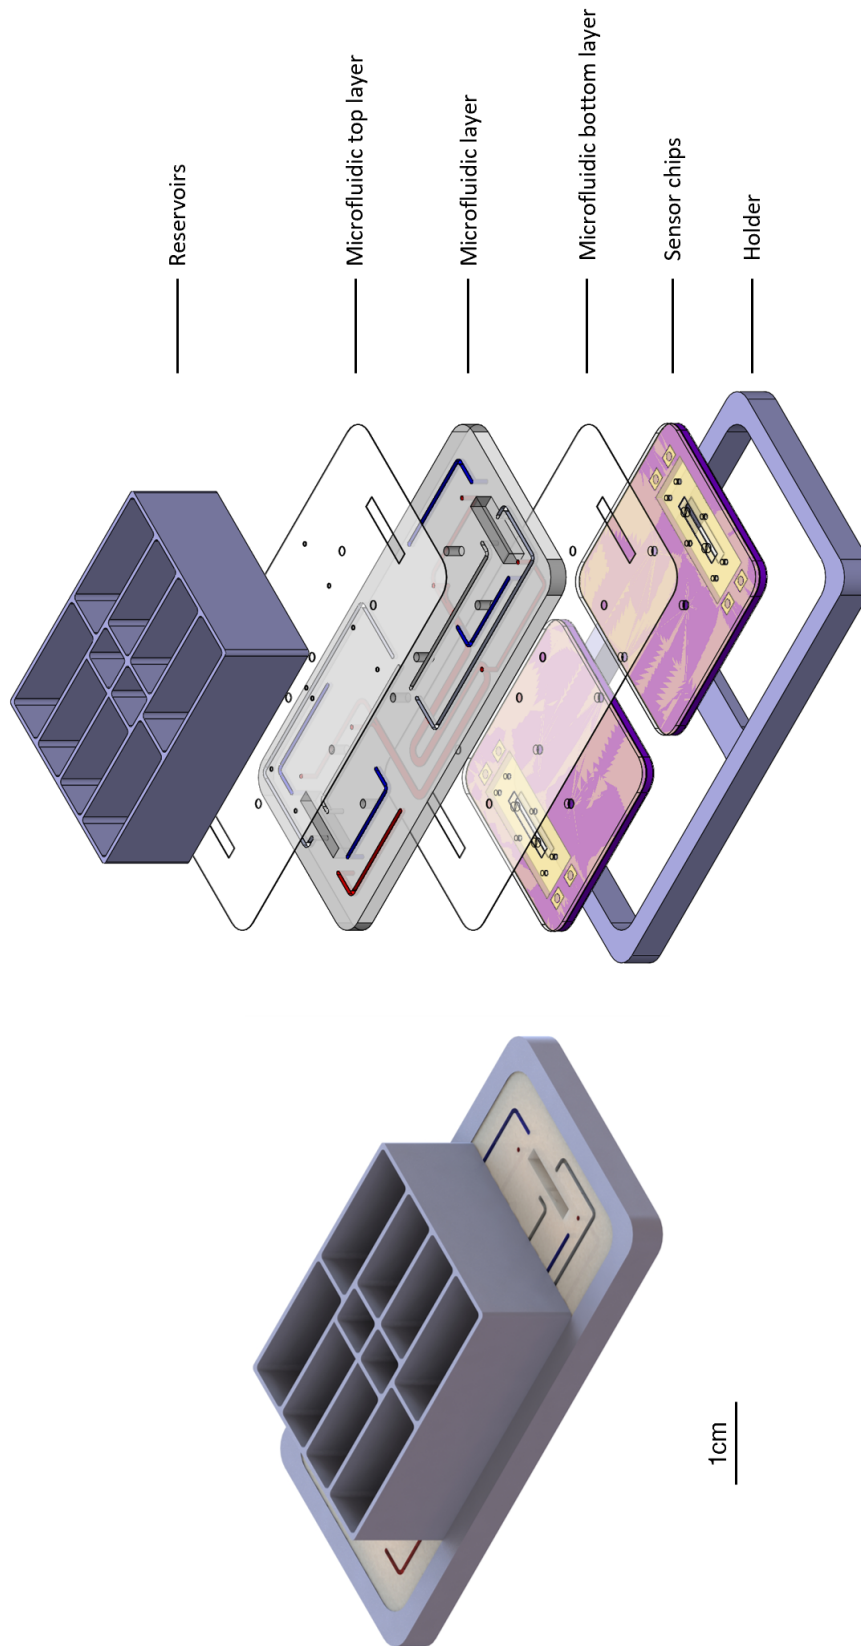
Third design iteration of linking system. This design does not rely on a custom made PCB anymore but used the conventional chip-PCB assembly. The chips are placed within a holder and the microfluidic layers and the reservoirs are added on top.
